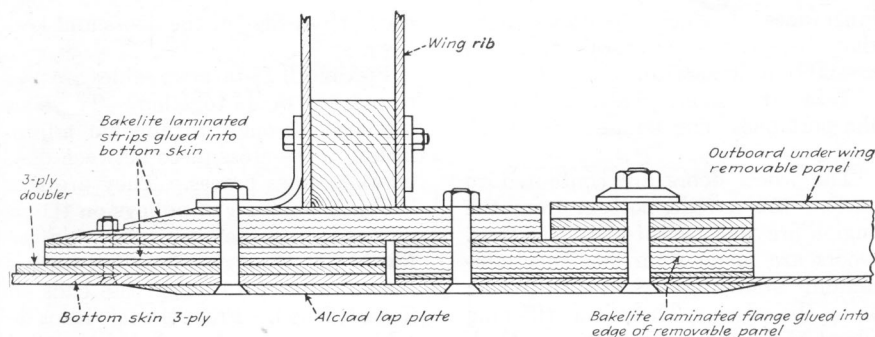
Detail of the tank bay panel attachment at rib 6, where alclad lap plate is used.
